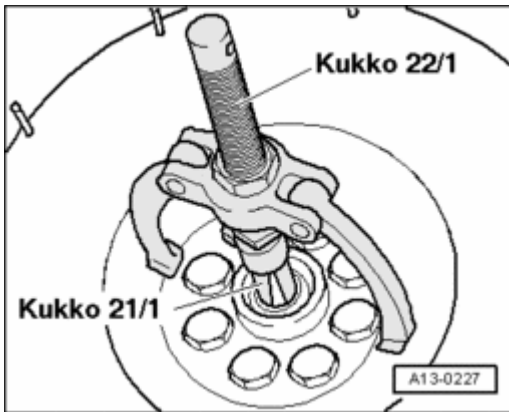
Pulling Out Pilot Needle Bearing Using Kukko 21/1 And Kukko 22/1
